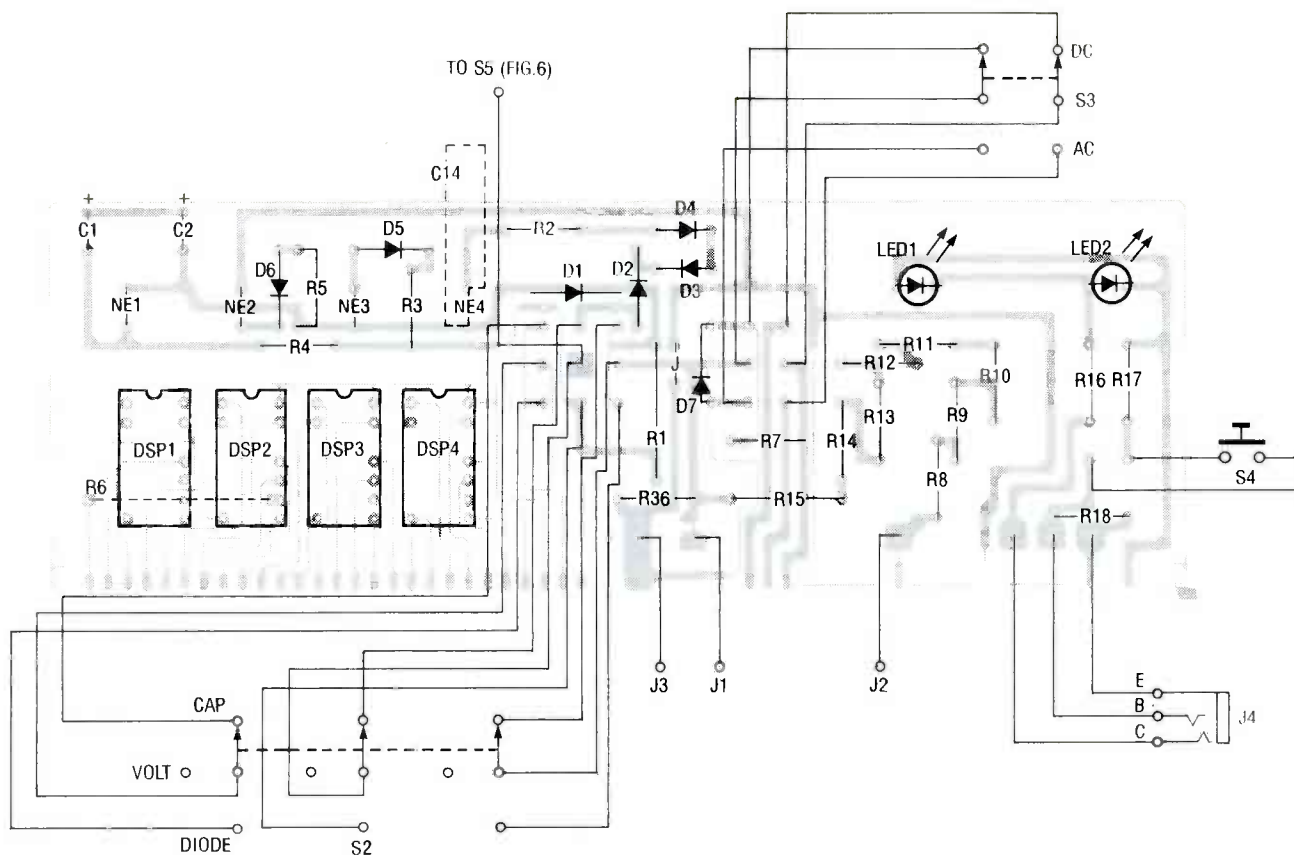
MOUNT THE PARTS ON THE DISPLAY BOARD as shown here. Note that R6 and C14 are soldered to the back of the board.
